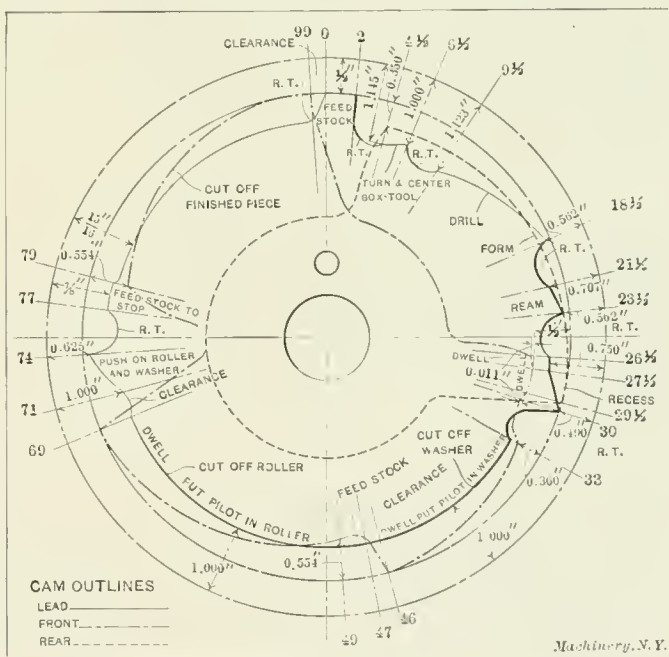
Lay-out of the Cams for Making and Assembling the Various Pieces
